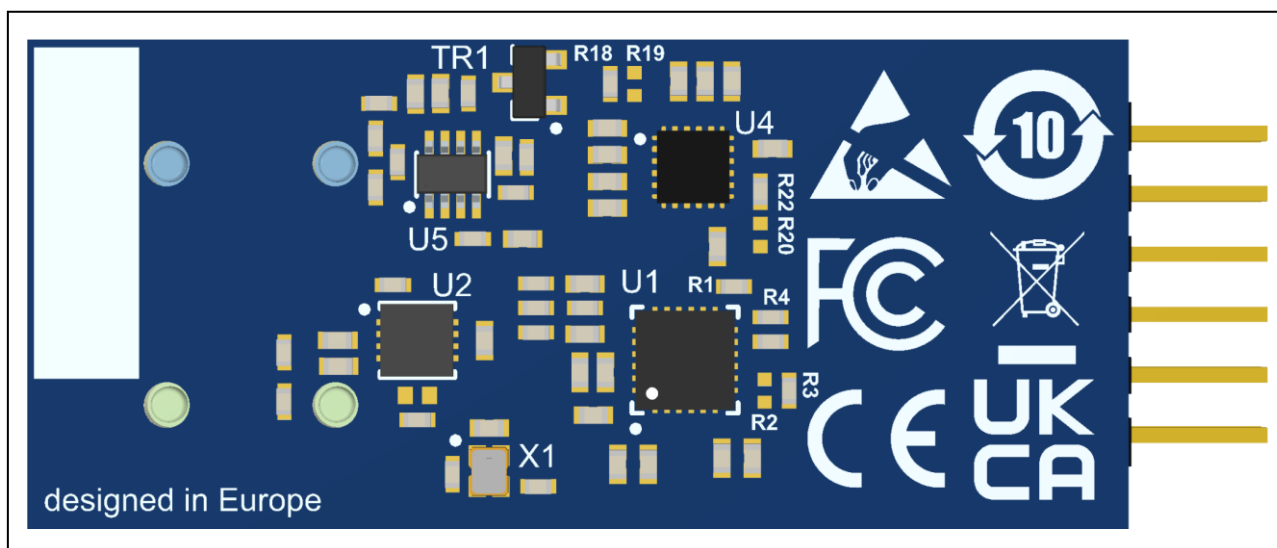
Y-COMMON-PMOD-I2S-AUDIO-EXT board bottom view
